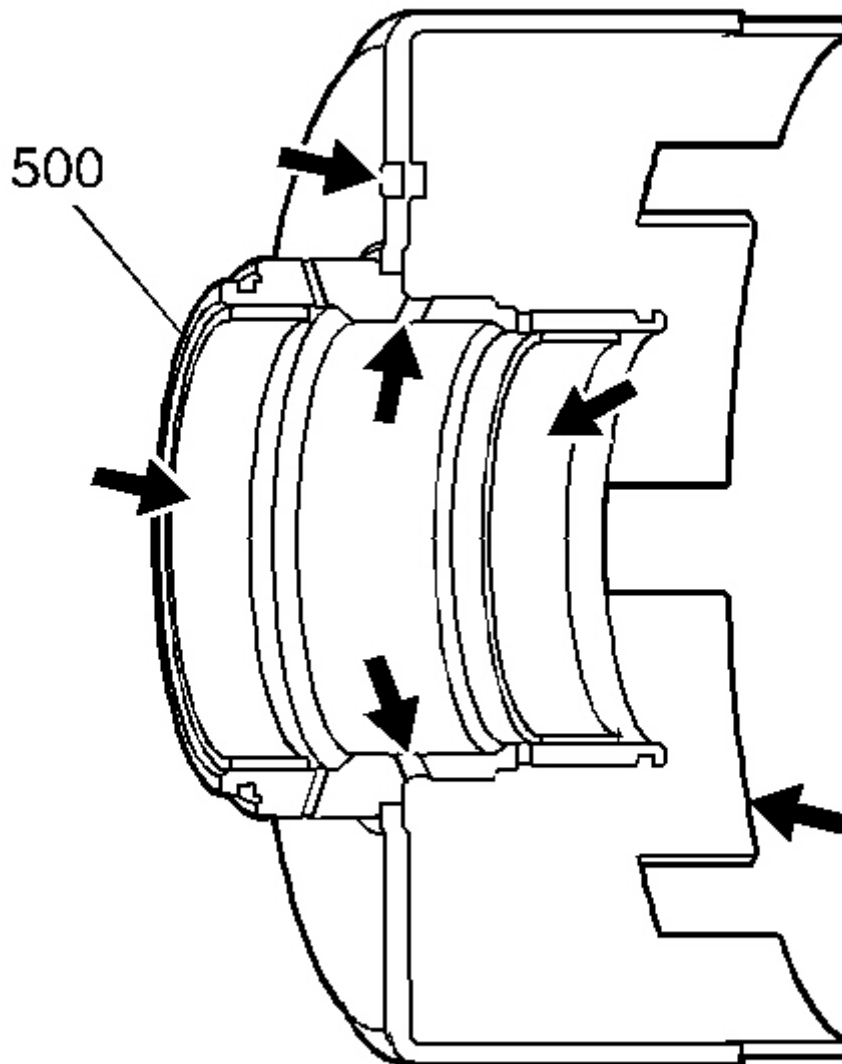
Identifying Inspection Areas On Reverse Clutch Housing
